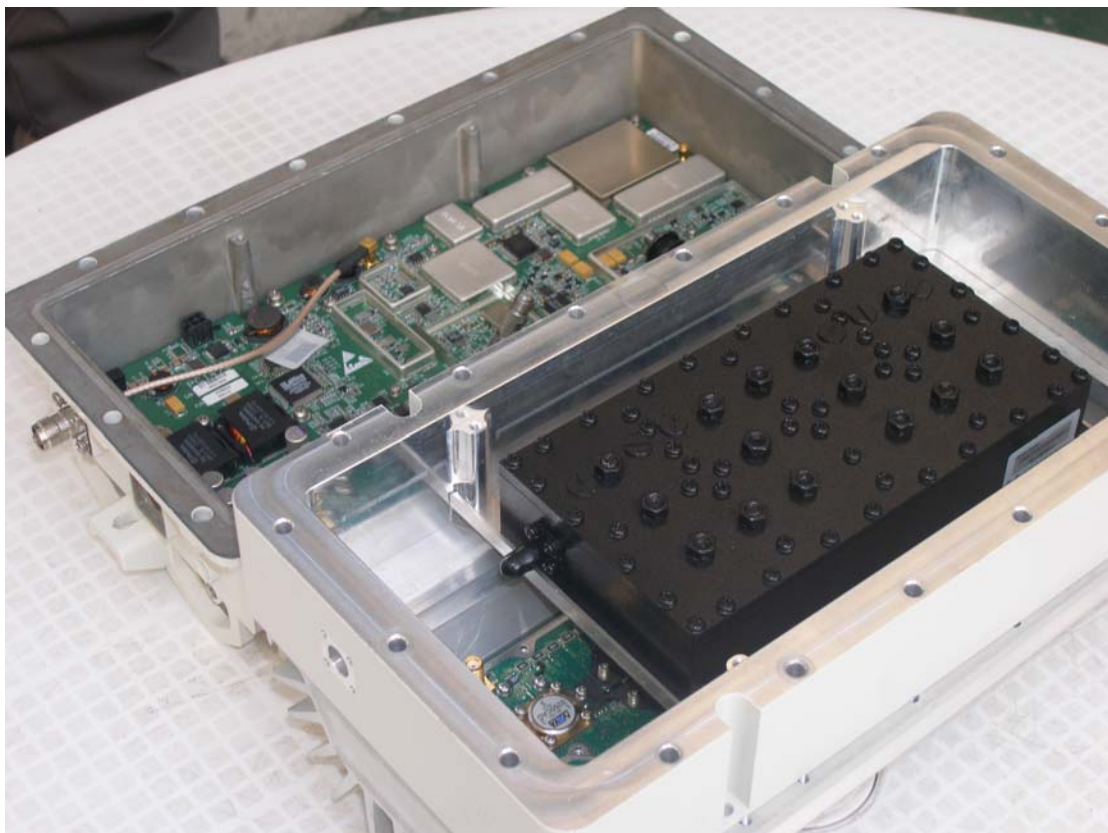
ODU open cover, left side Basic unit PCB , right side cavity filter and power amplifier PCB
